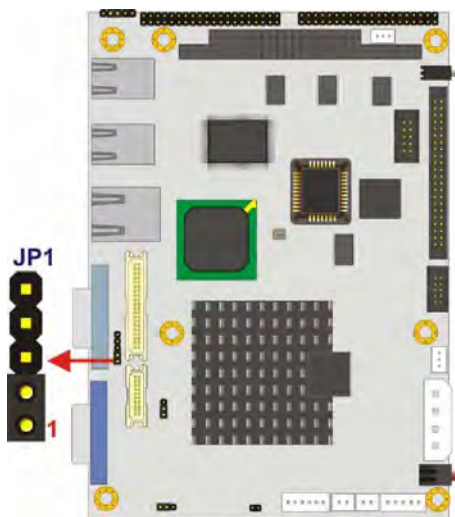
COM 1 Pin 9 Setting Jumper Location
